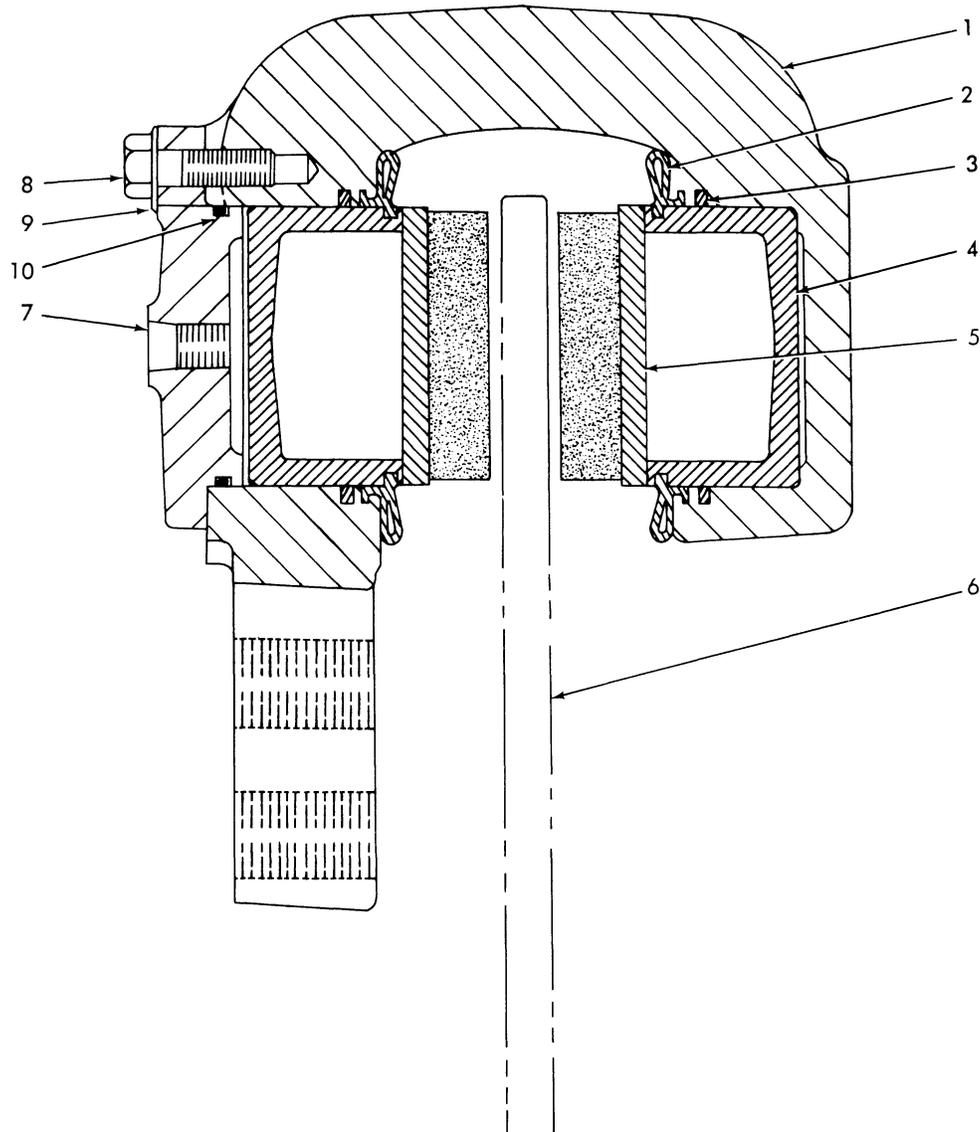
BRAKE HEAD ASSEMBLY(Cross-section)
